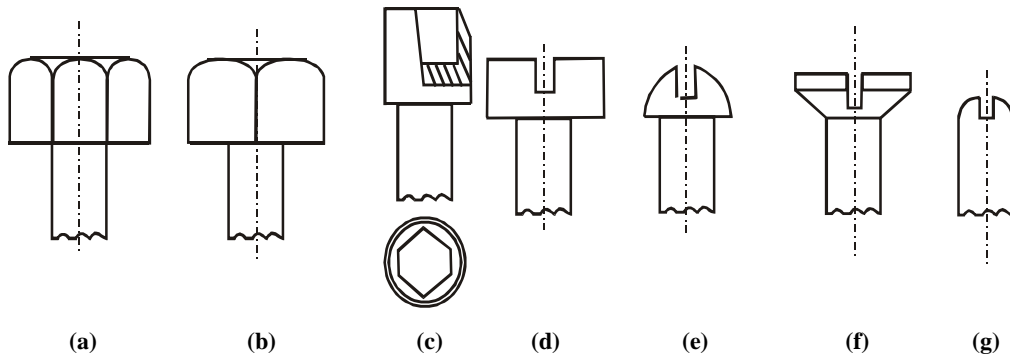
Heads of Threaded Fasteners; (a) Hexagonal; (b) Square; (c) Internal Socket; (d) Circular with a Slit; (e) Button with Slit; (f) Counter Sunk with a Slit; (g) Plain with a Slit
